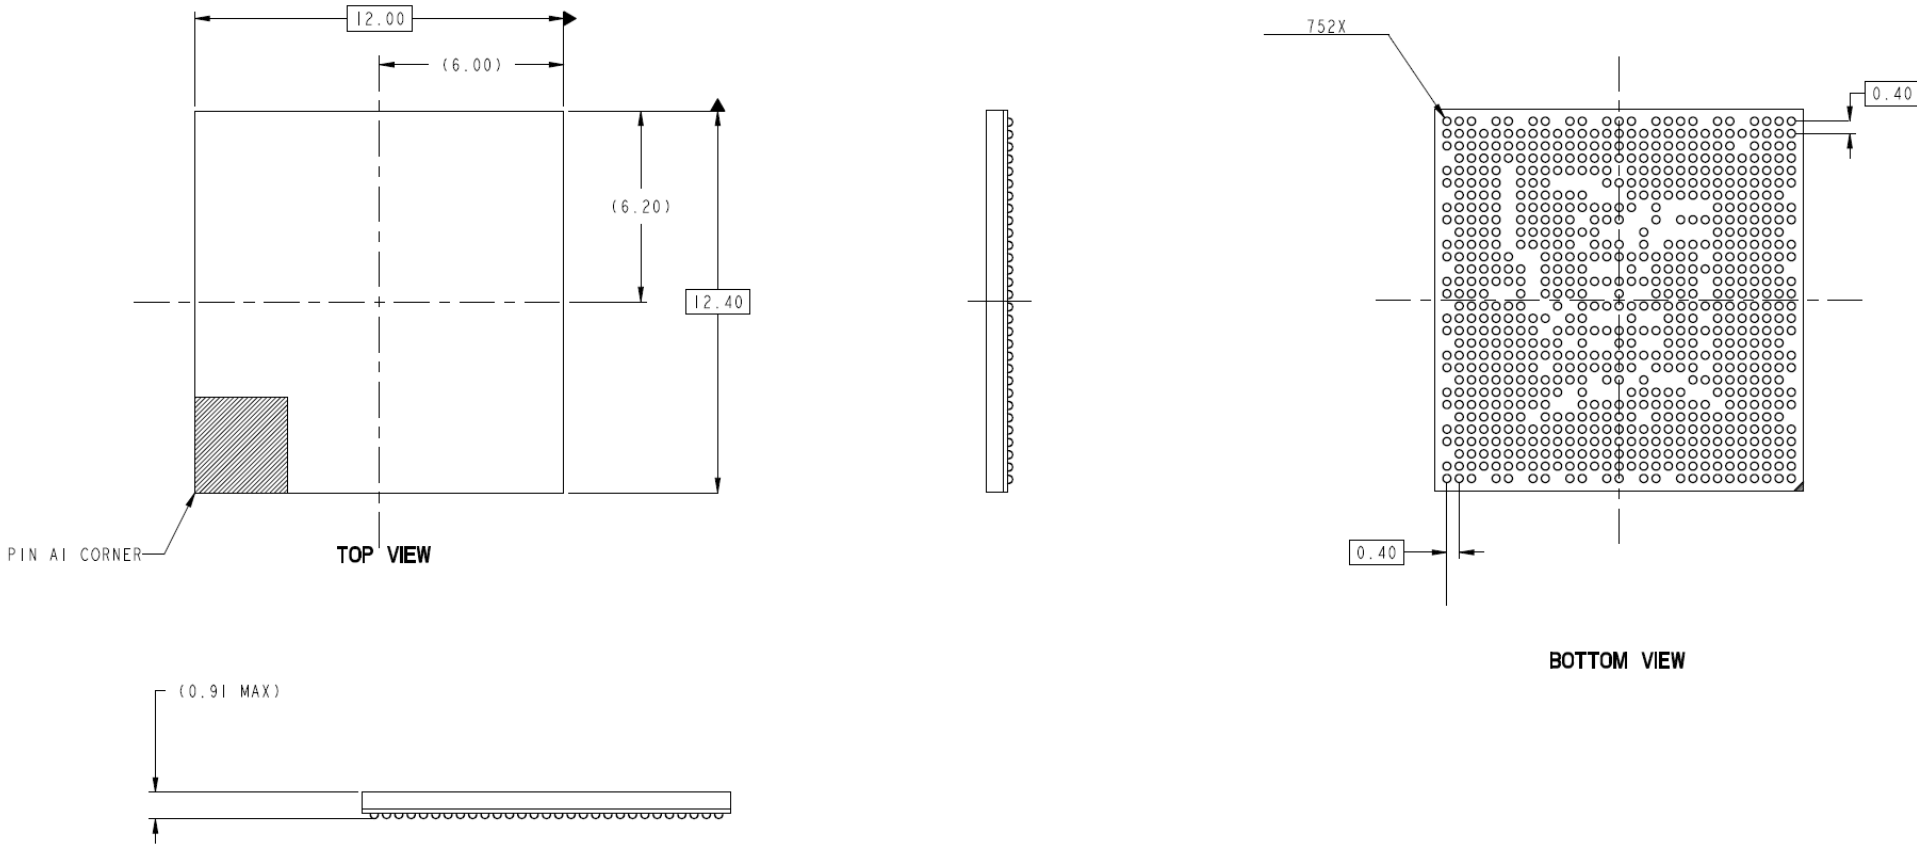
NSP752 (12.0 × 12.4 × 0.91 mm) outline drawing
